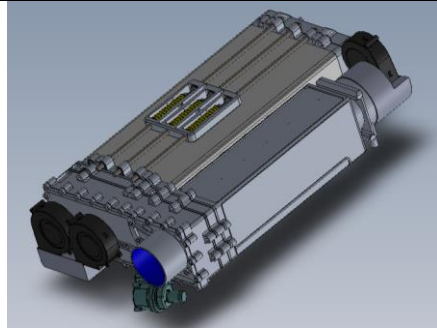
A CAD drawing of a Serenergy fuel cell engine. The dimension of the fuel cell engine is 700mmX300mmX200mm.
